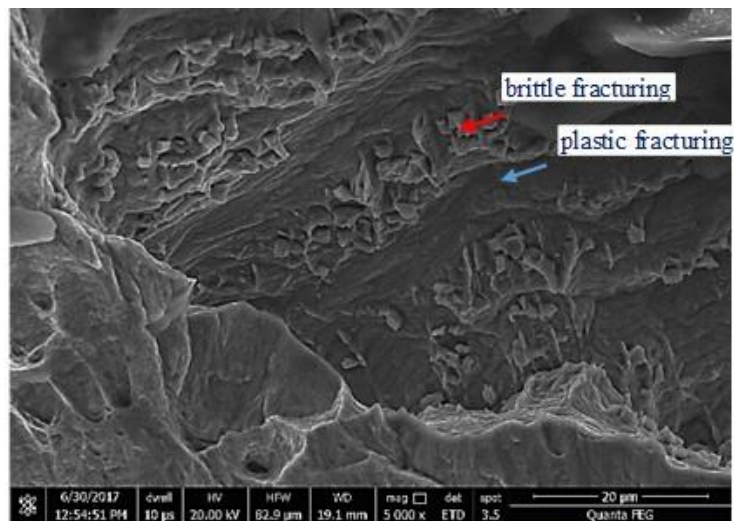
Fracture obtained in a static tensile test of 1.4539 steel welded joint made with TIG method
